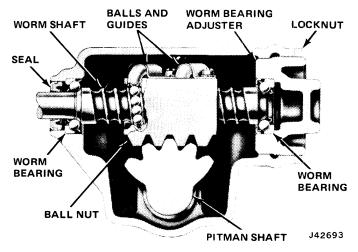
Recirculating Ball Gear—Left-Hand Drive Vehicles
